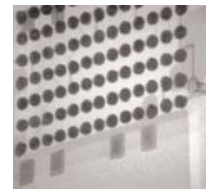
EMPF-009 Rework & Repair Solder Joints X-Ray
